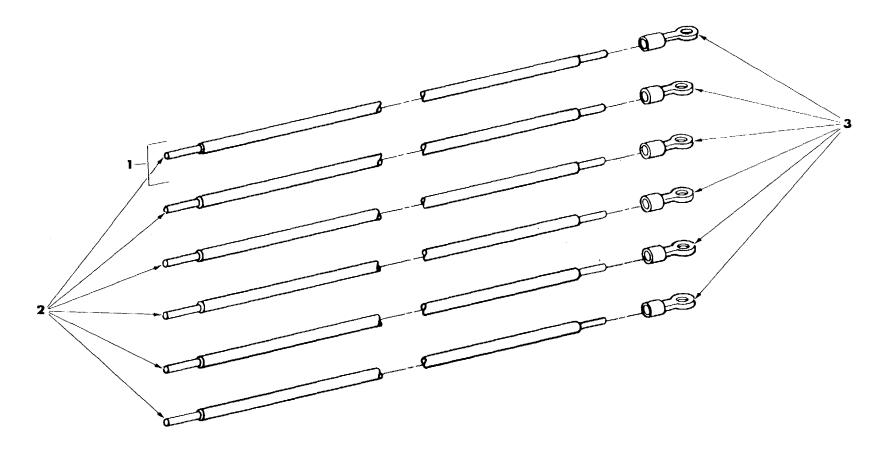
Harness assembly, wiring 7551097-1, switchbox to distribution panel; and wire assembly 12011690-1.
